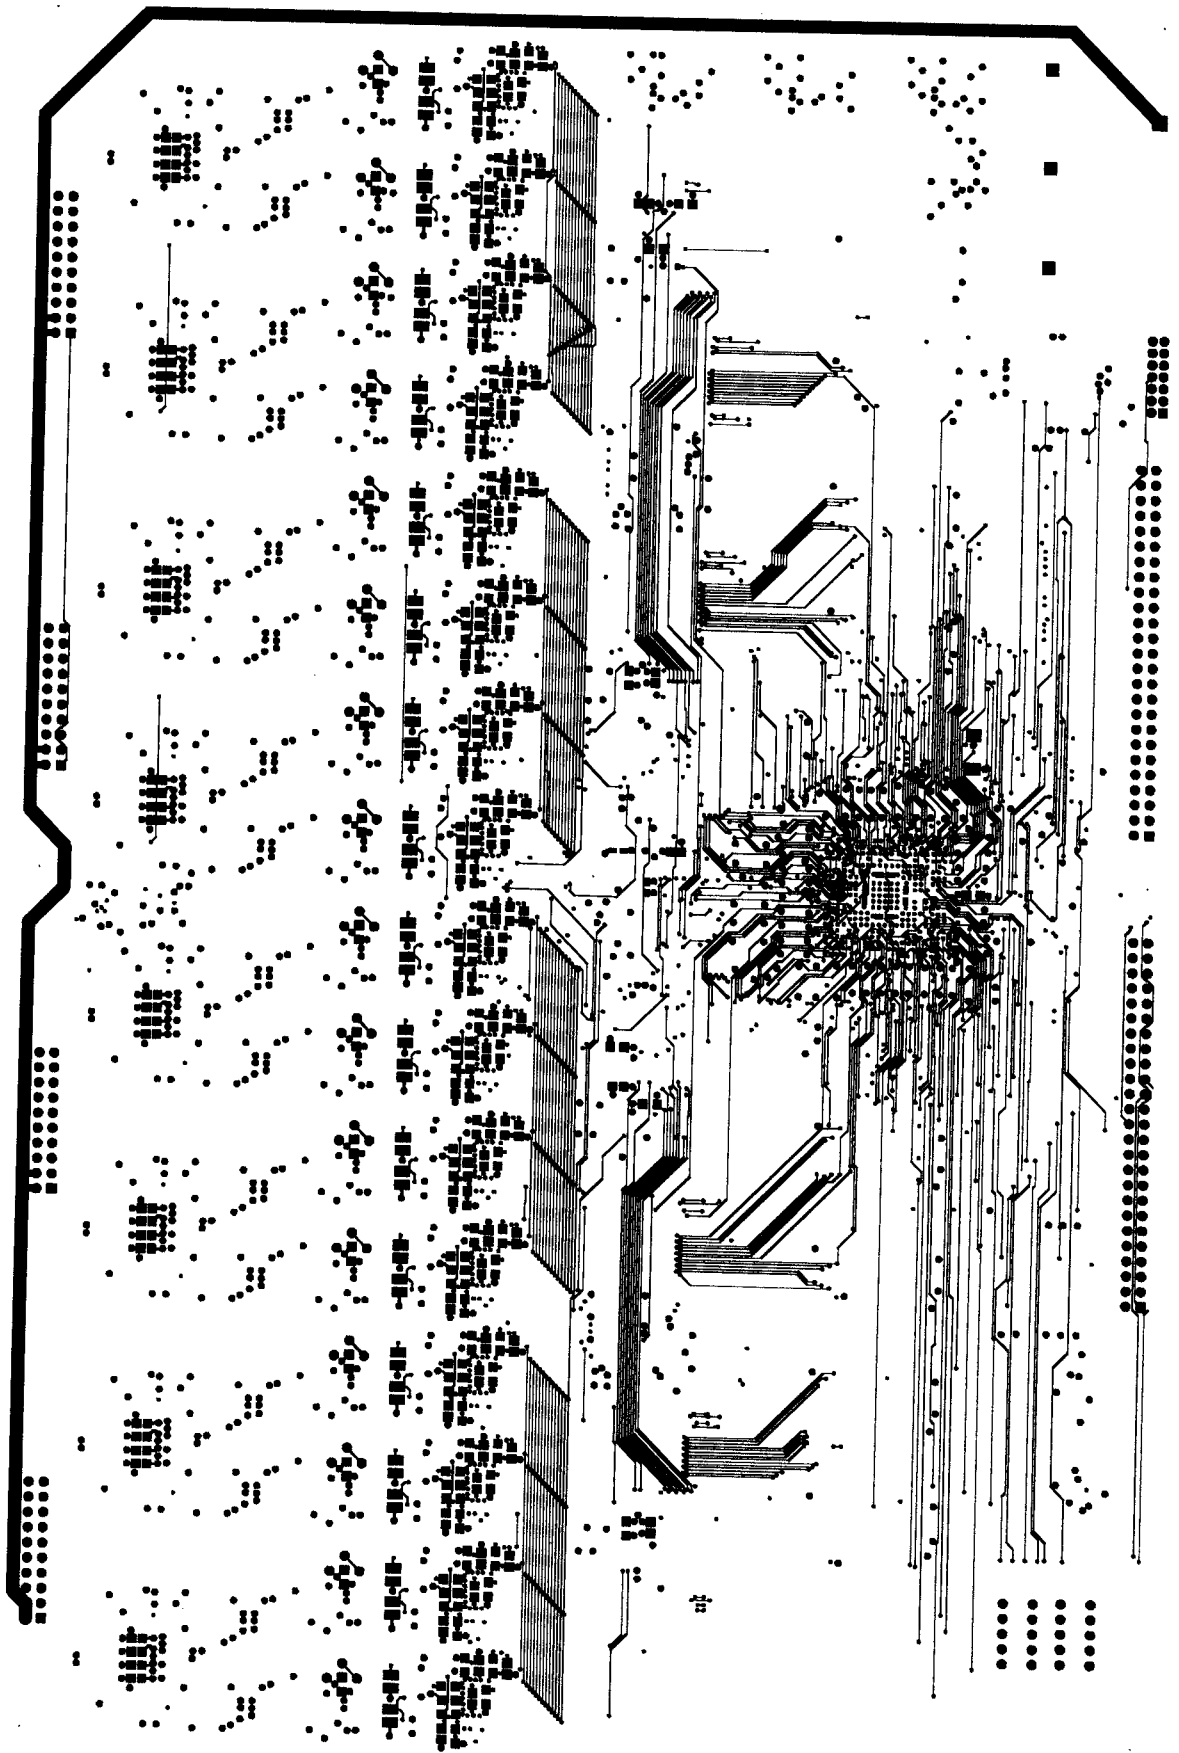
Main Board, PCB Bottom Layer, Gerber Drawing
